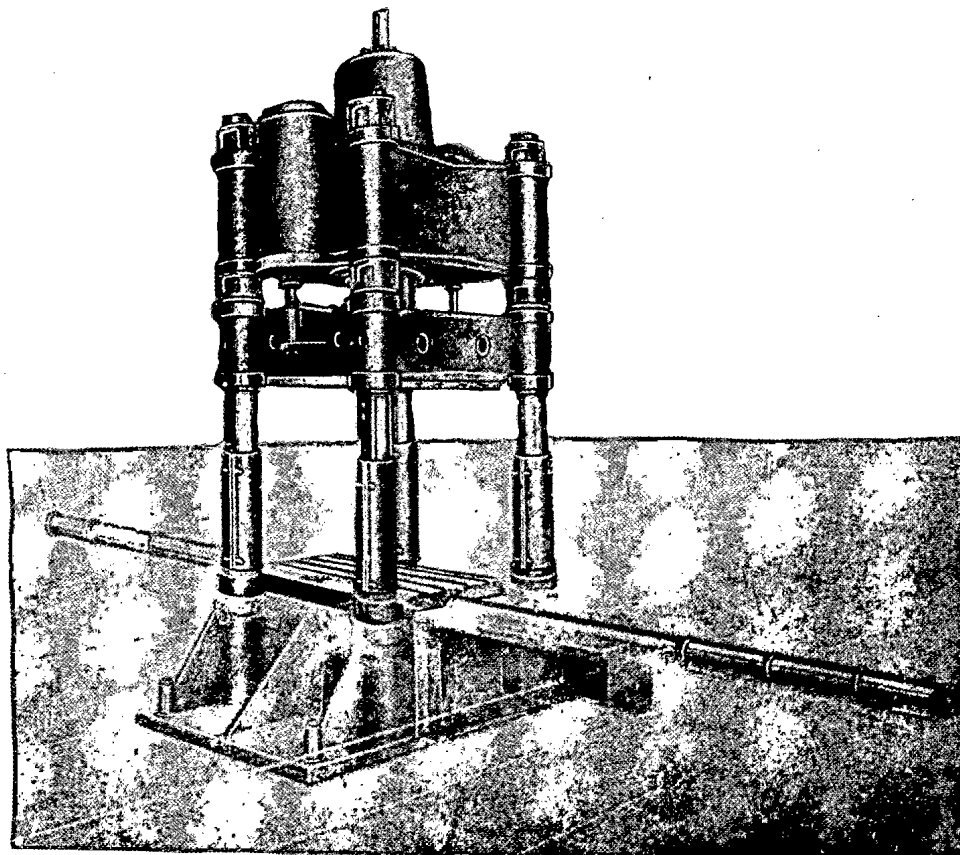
USSR: P-142 800-Ton 4-Column Steam-Hydraulic Forging Press.
